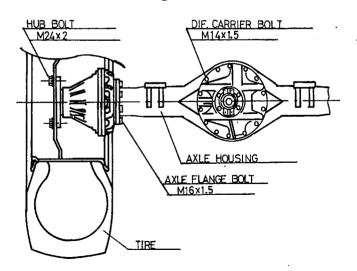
The axle part of Construction machinery (Wheel Loader)
